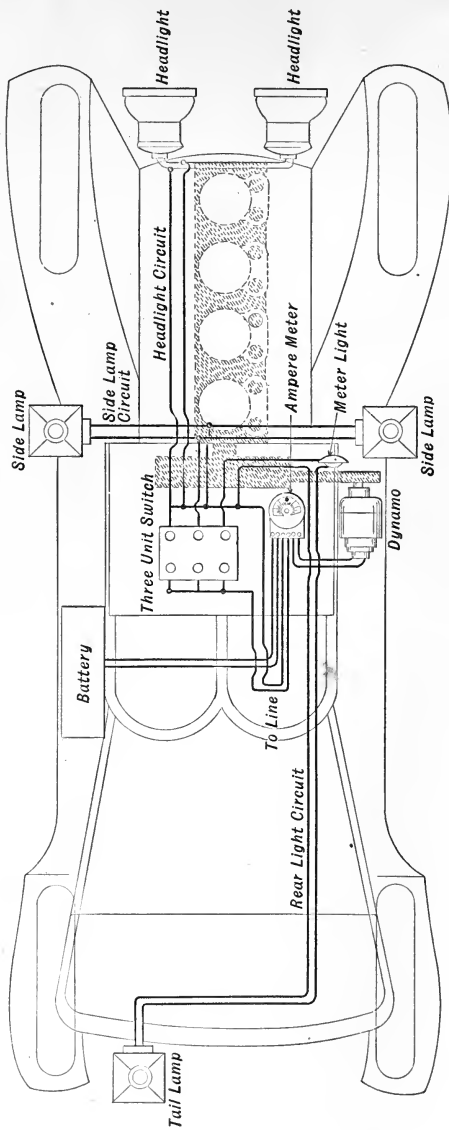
Complete Six-Lamp, Three-Circuit Electric-Lighting System with Mechanical and Chemical Current Producers.
